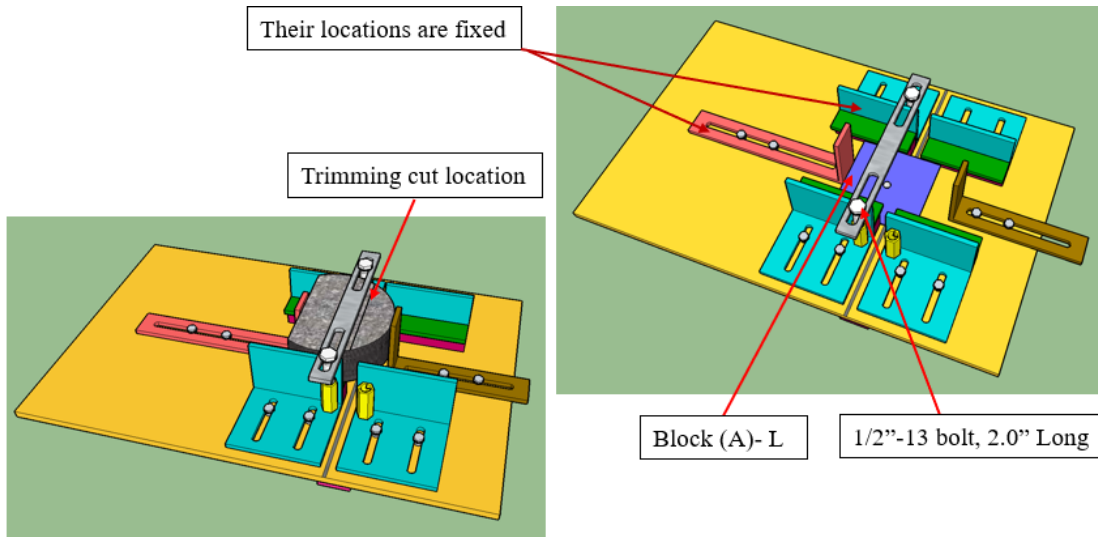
Illustration drawings to the second trimming of RH specimens.
